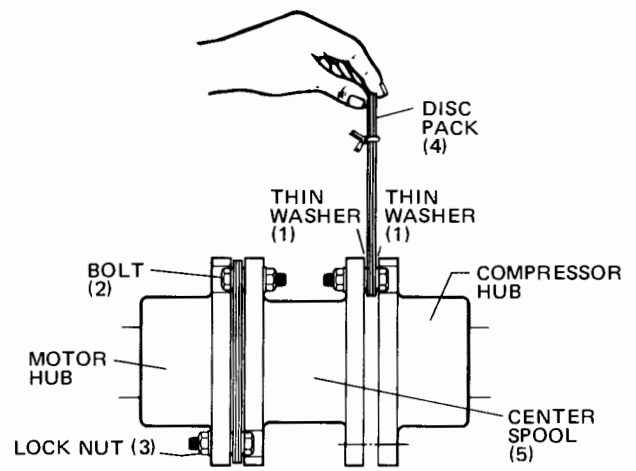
DISC PACK ASSEMBLED BETWEEN COMPRESSOR HUB AND CENTER SPOOL
